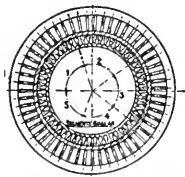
PISTON-HEAD RIBBING, STILL ENGINE
